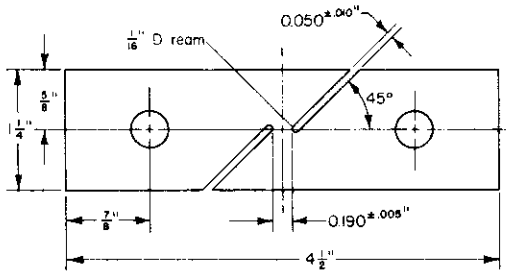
SHEET SHEAR TEST SPECIMEN
